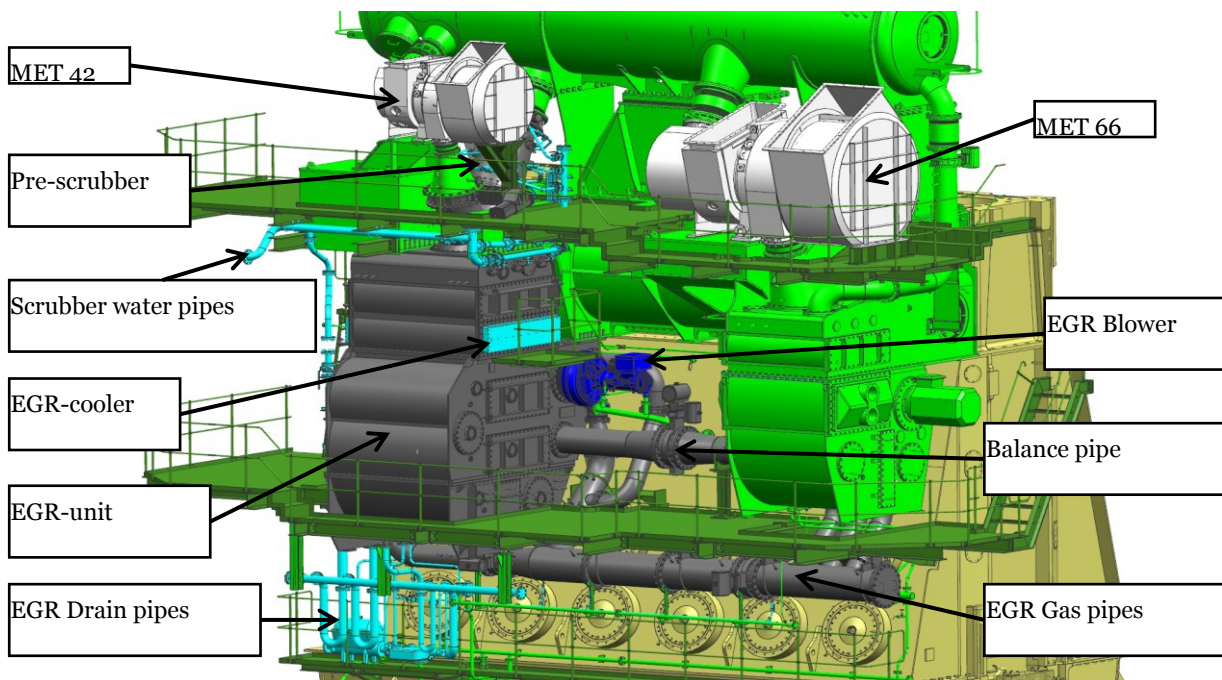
View of the exhaust side of 6S80ME-C9 and material selection for the stainless steel parts.
